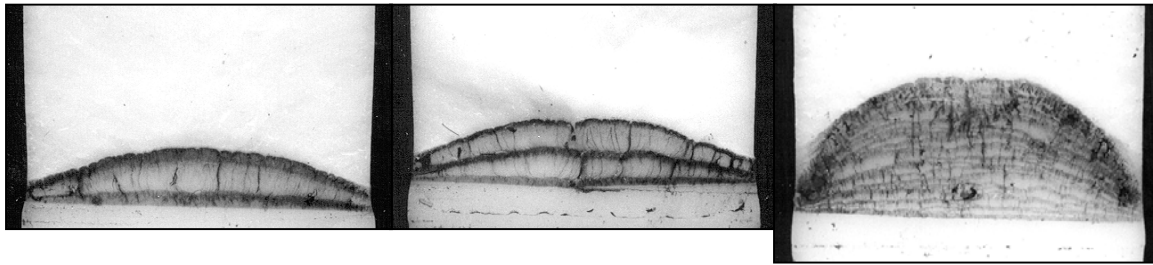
Run-arrest fracture surfaces of PTFE specimens 97, 77, and 102 respectively.
